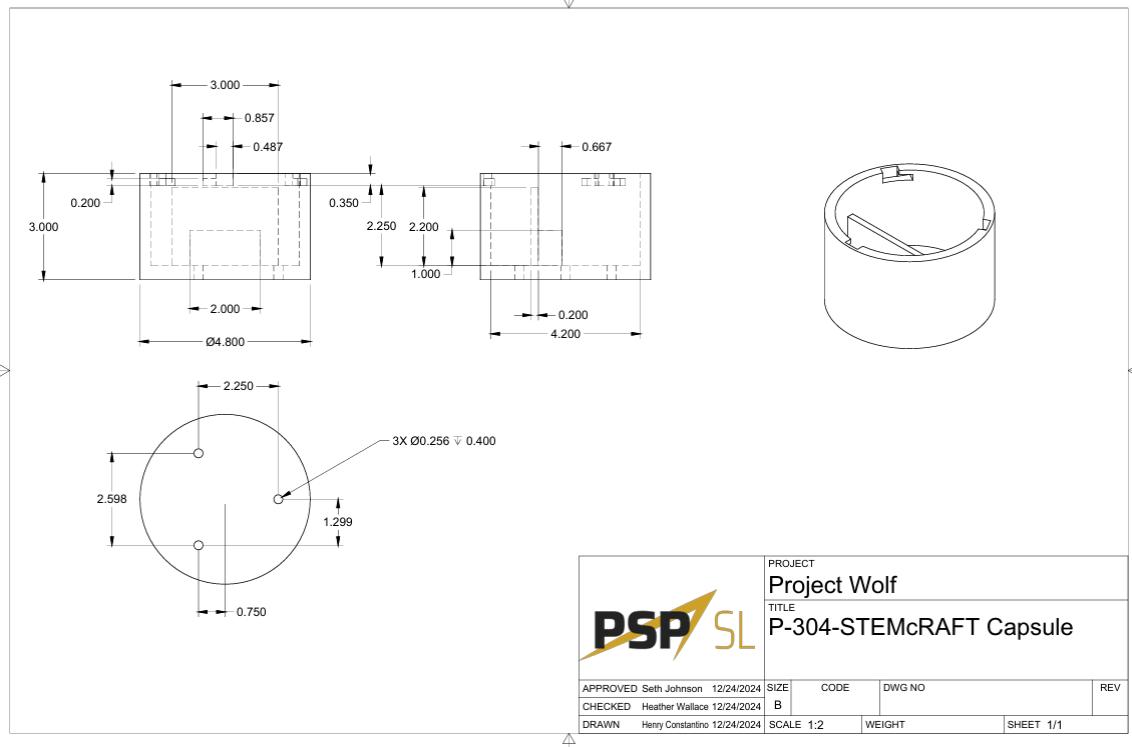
STEMnaut Capsule Technical Drawing
